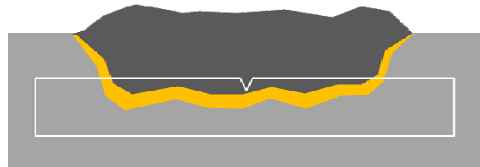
Localization of the CNV subspecimen in welded coupon.
